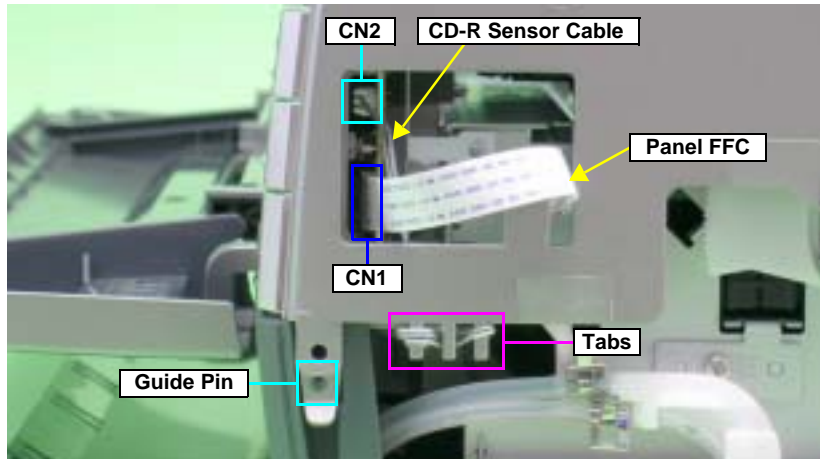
Disconnecting the CD-R Sensor Cable and Panel FFC
